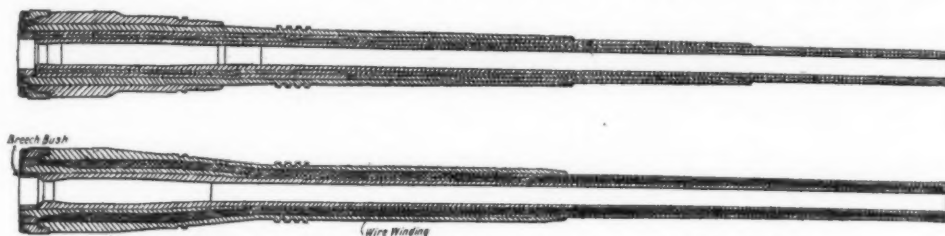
(Upper) Gun built up of steel tubes. Fig. 2.—(Lower) Wire-wound gun.
